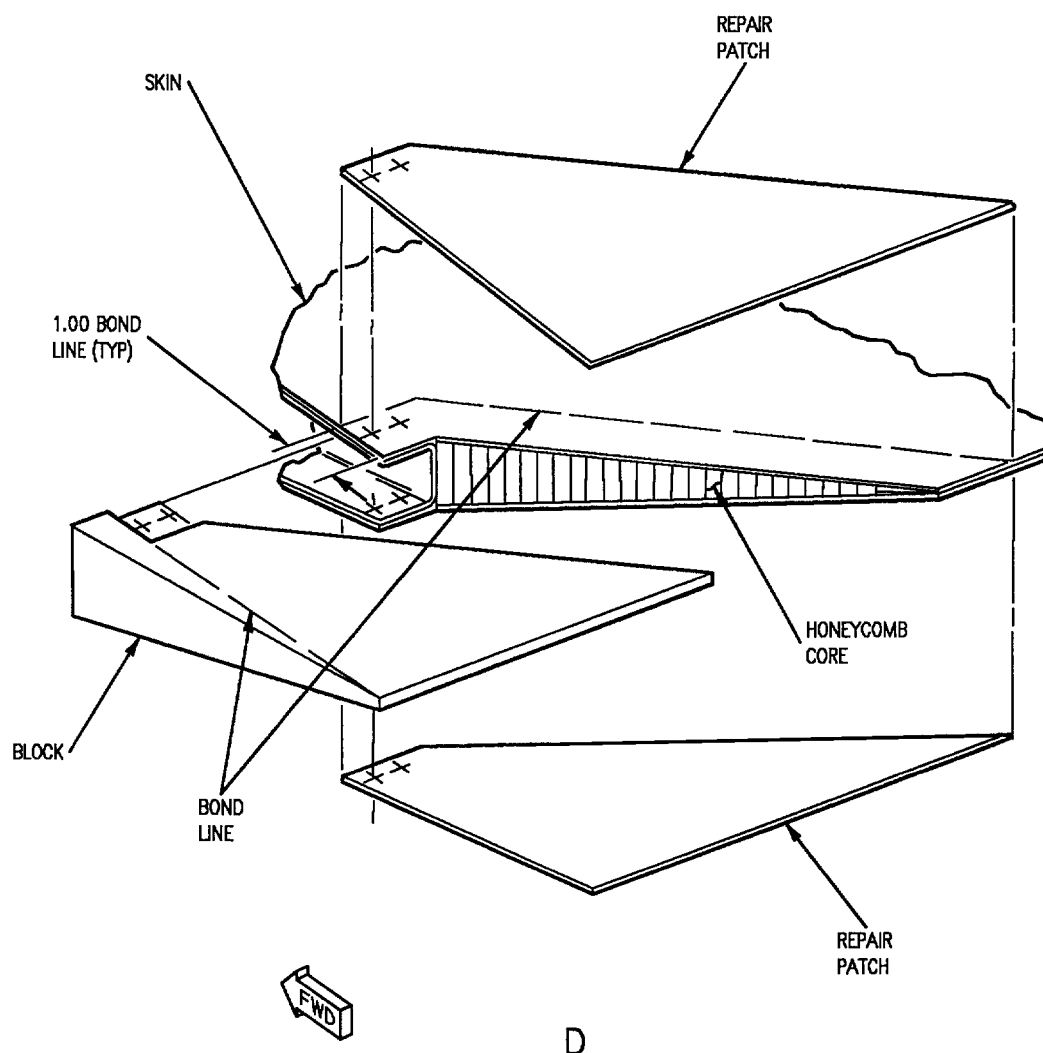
Trailing Edge Inboard or Outboard Corner Repair Without Rib Fabrication
